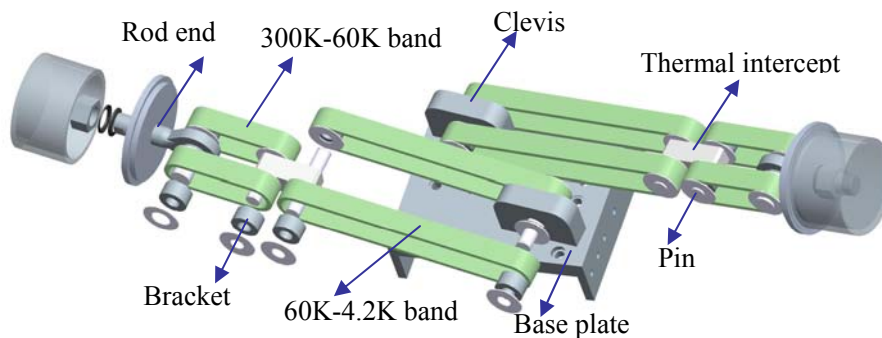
A 3D view of coupling magnet cold mass support assembly
